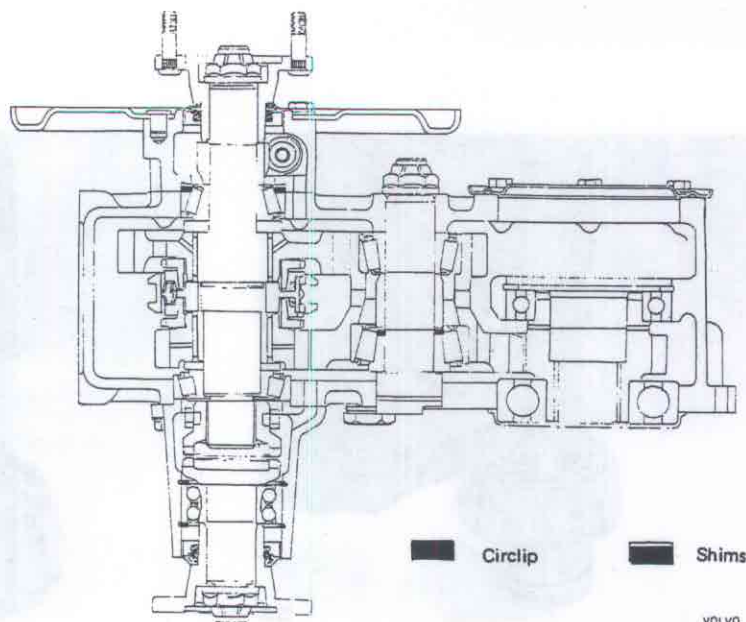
Alternative shims and circlips in auxiliary gearbox
